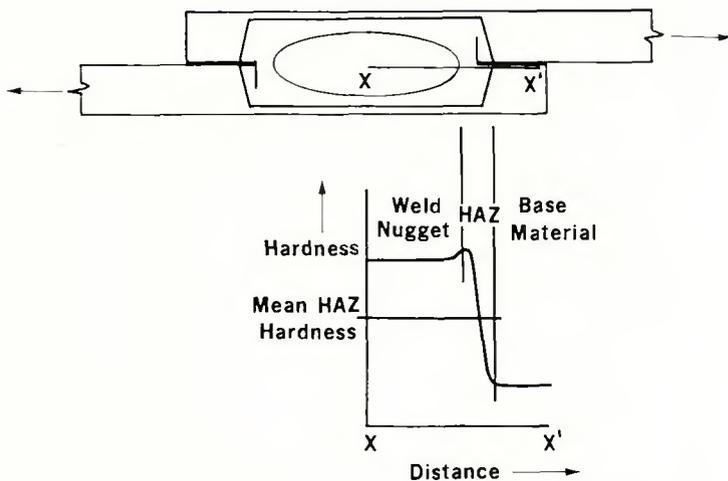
Cross-section of spot weld showing hardness profile and location of fatigue cracks
